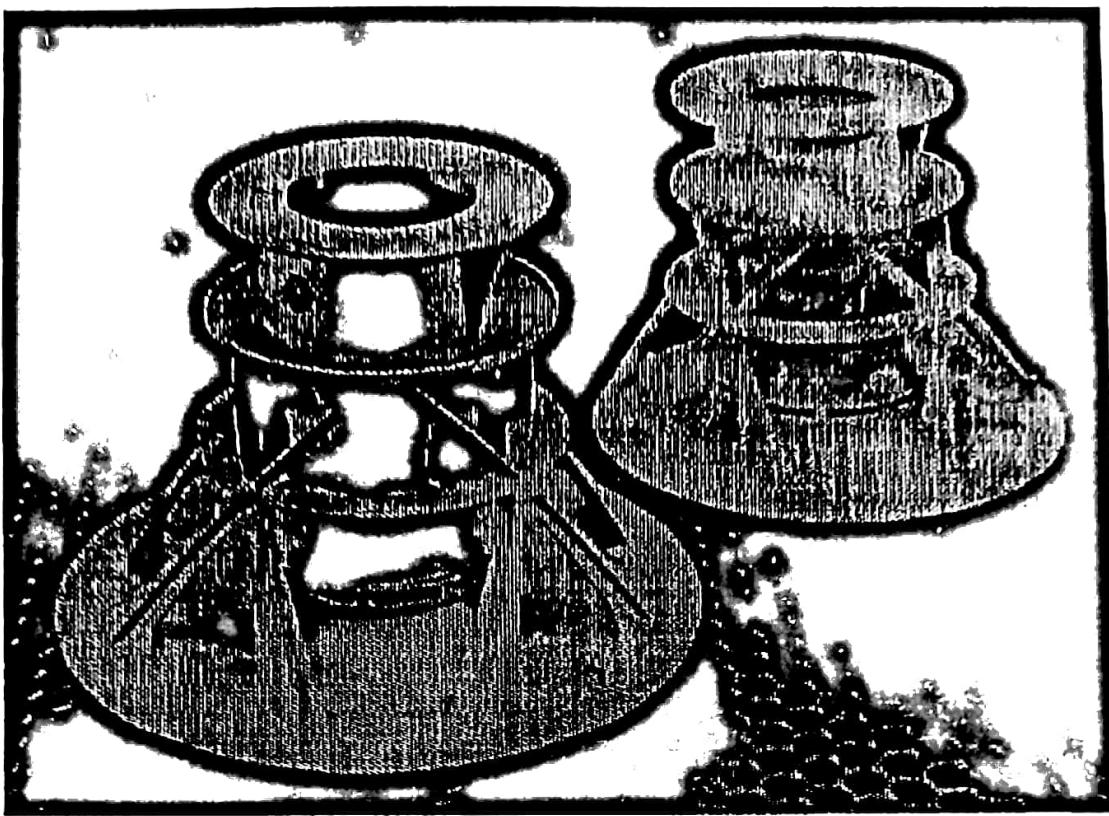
Polycarbonate investment-casting pattern (right) and the steel air inlet housing (right) for a jet turbine engine (Courtesy DTM Corporation)
